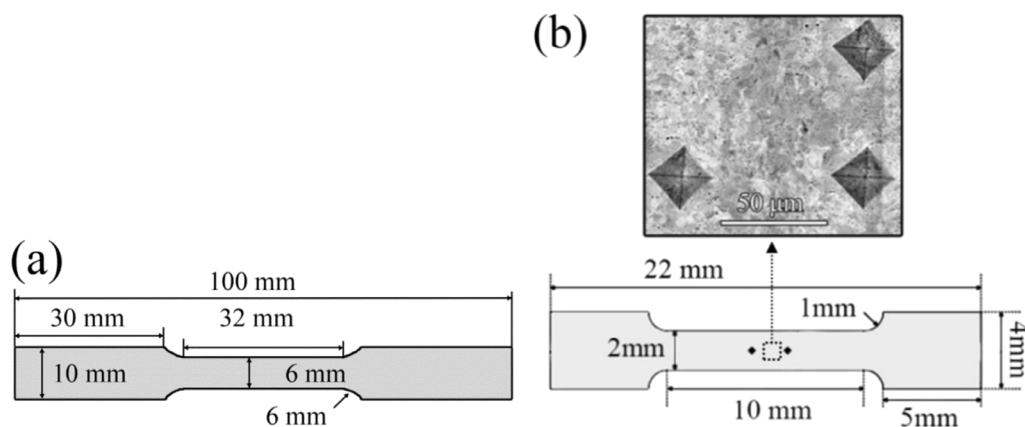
Drawings of the different tensile specimens dimensions, (a) sub size specimen according to the ASTM E8/E8M-13a [19], (b) miniature specimen in which indentations to delimit inspection area and determine plastic strains are indicated.
